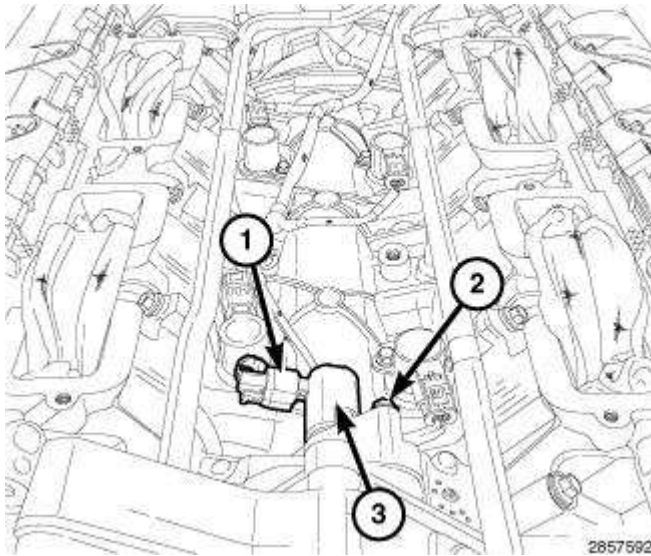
Oil Control Valve, Electrical Connector & Retaining Bolt
